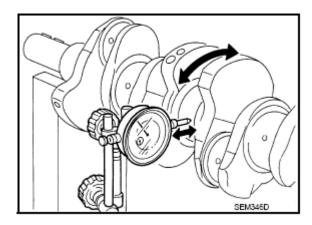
Measuring Crankshaft Runout Using Dial Indicator Courtesy of NISSAN NORTH AMERICA, INC.
